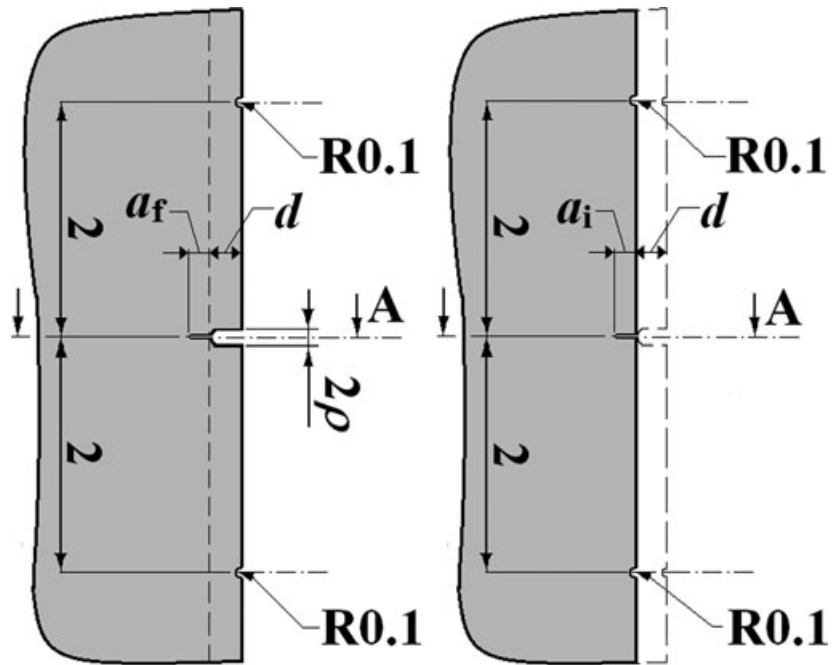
(a) Crack initiated at root of starter notch; end of stage ‘i’. (b) Cracked specimen after machining away the starter notch; beginning of stage ‘p’.
